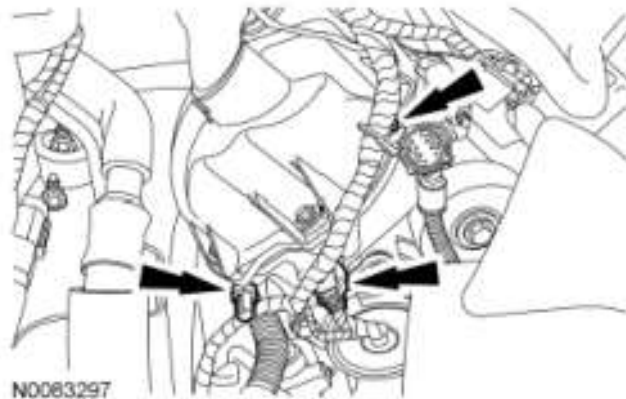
Locating RH CMP Sensor Electrical Connector And Wiring Harness Retainers
